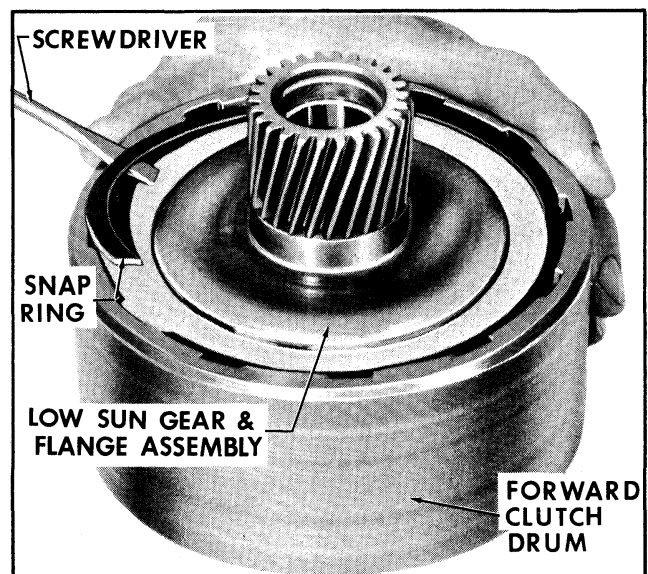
B-70 Removing Low Sun Gear and Flange Assembly Snap Ring
